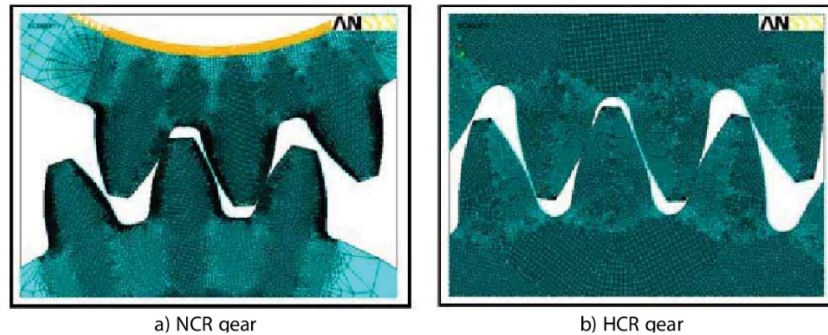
Typical appearance of standard NCR (left) and HCR (right) gearing [33].
